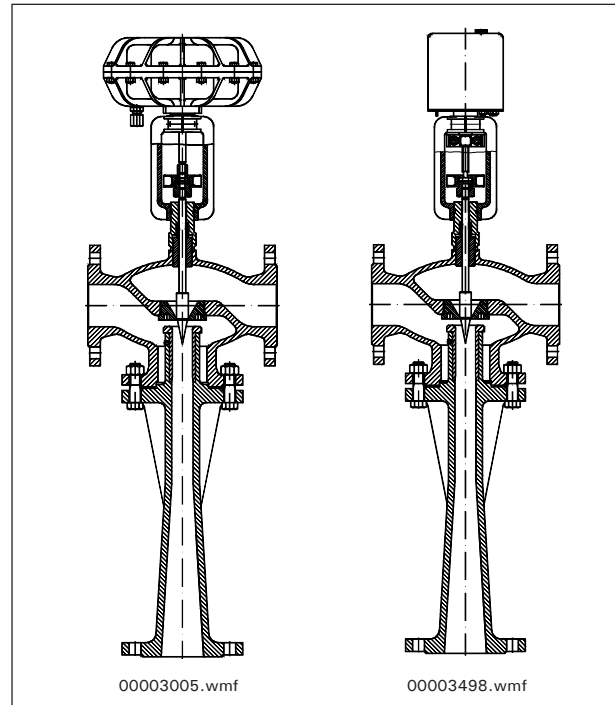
Controllable steam ejector with pneumatic actuator baelz 590-373-P21-6-Fo-S21 and with electrical motorized actuator baelz 590-373-E07-20-18-S21
